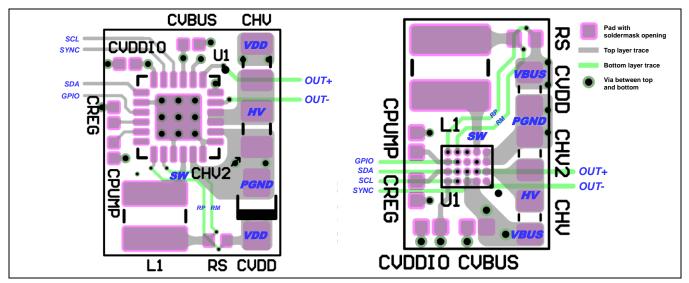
UPI configuration PCB layout examples for QFN 24L 4.0mm × 4.0mm (left) and typical configuration for WLCSP 20B 2.1mm × 1.7mm (right)
